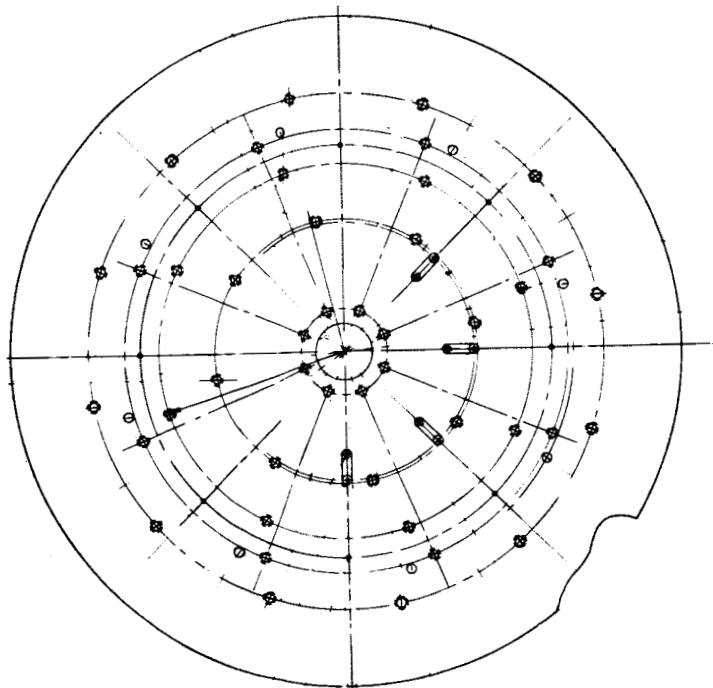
(b) TEST COVER PLATE, NPX-104-66, TOP
